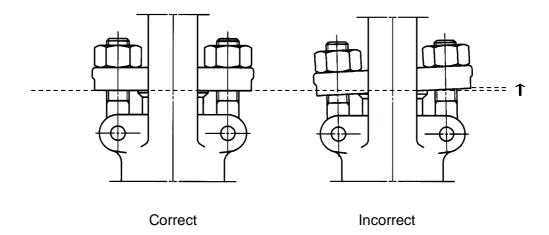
Examples for Adjustment (Tightening) of Gland bolt nuts
